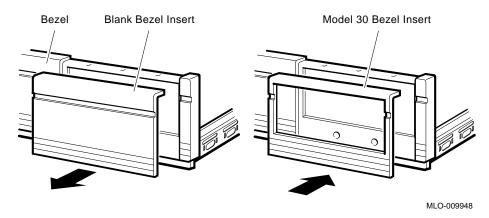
Attaching the TZK10/TZK11 Dress Bezel Insert and Mounting Bracket
